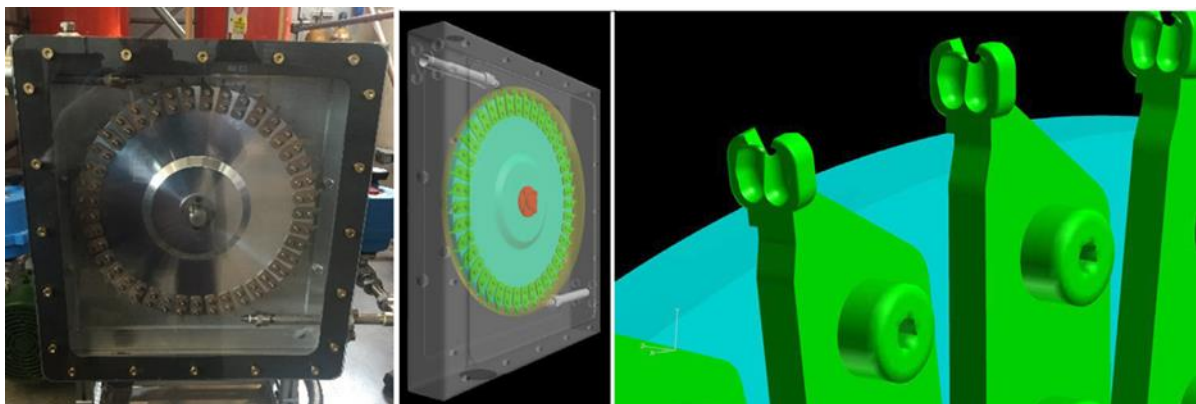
GLIDES v1 Pelton turbine configuration, left: physical turbine, middle: overall geometry, right: zoomed in view showing bucket geometry
